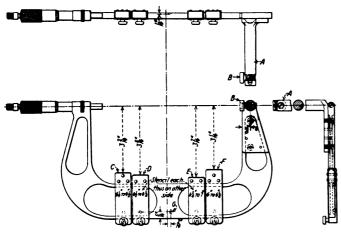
Micrometer Caliper with Special Attachment for Measuring Wheel Seats on Axles
